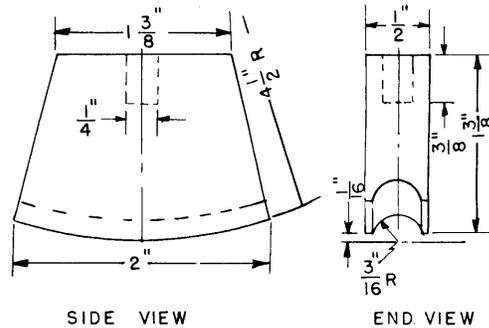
Dimensional Sketch of Tape-Aligning Guards and Weight-Support Bracket
